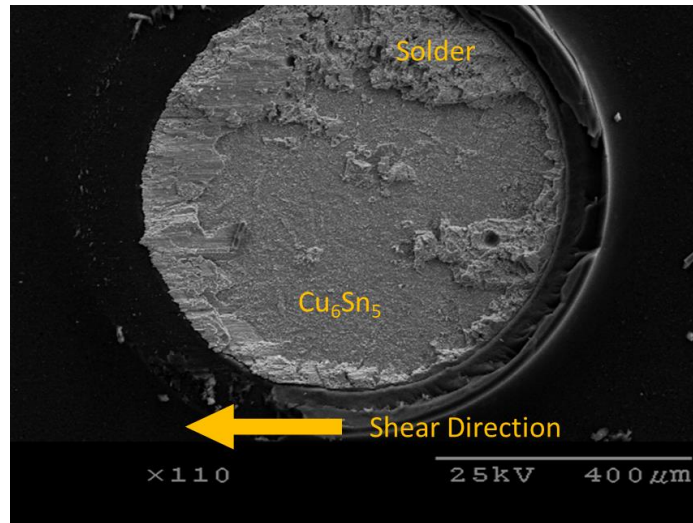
Top view of the fractured surface of the mixed failure mode for OSP surface finish
